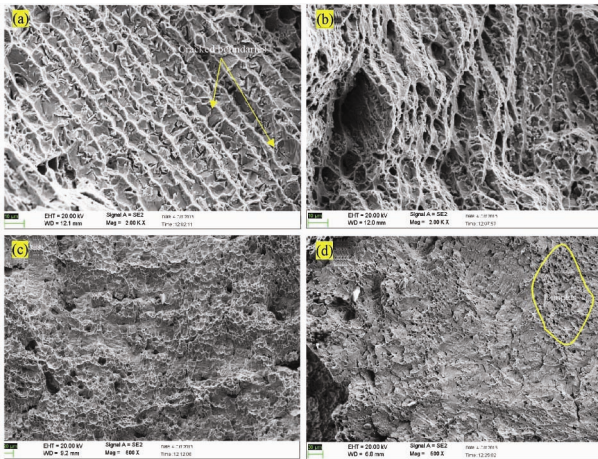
Fractographs of Charpy Impact test samples of GTA weldments and PCGTA weldments employing: (a) and (b) ER2209 filler; (c) and (d) ERNiCr-3 filler respectively.
